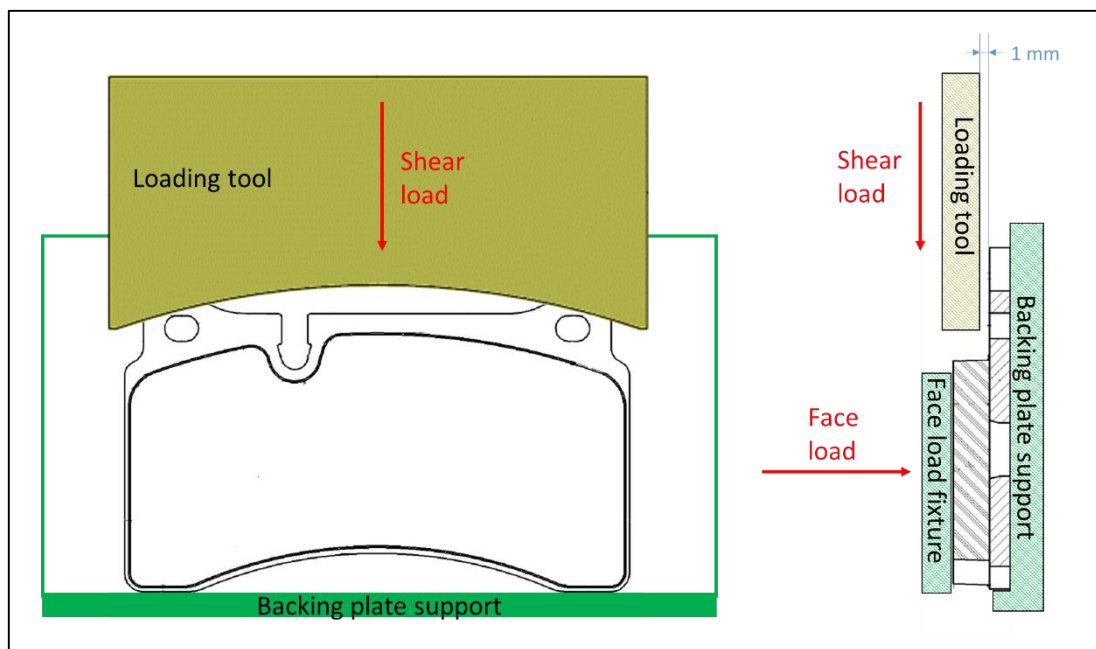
Front and side view of disc brake pad test fixture according to ISO 6312:2001
